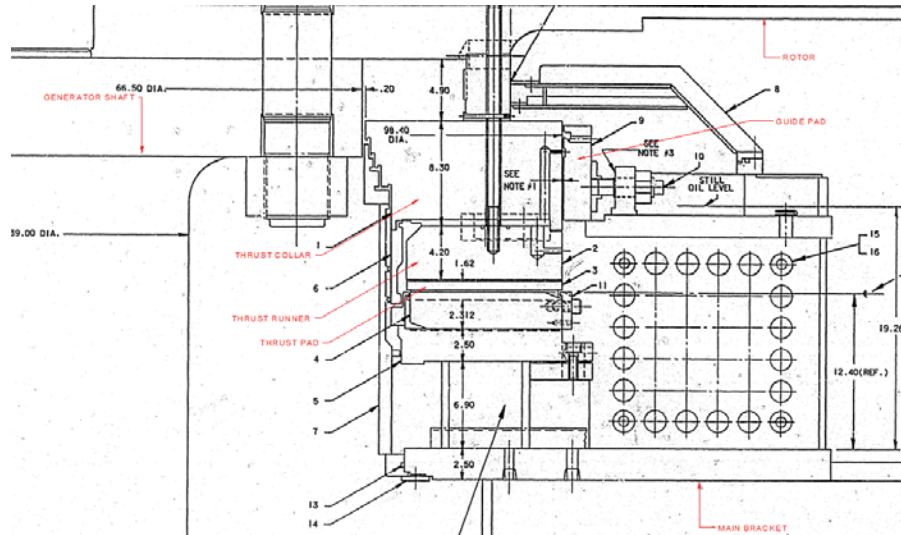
Combination Guide and Thrust Bearing Cross-Section
